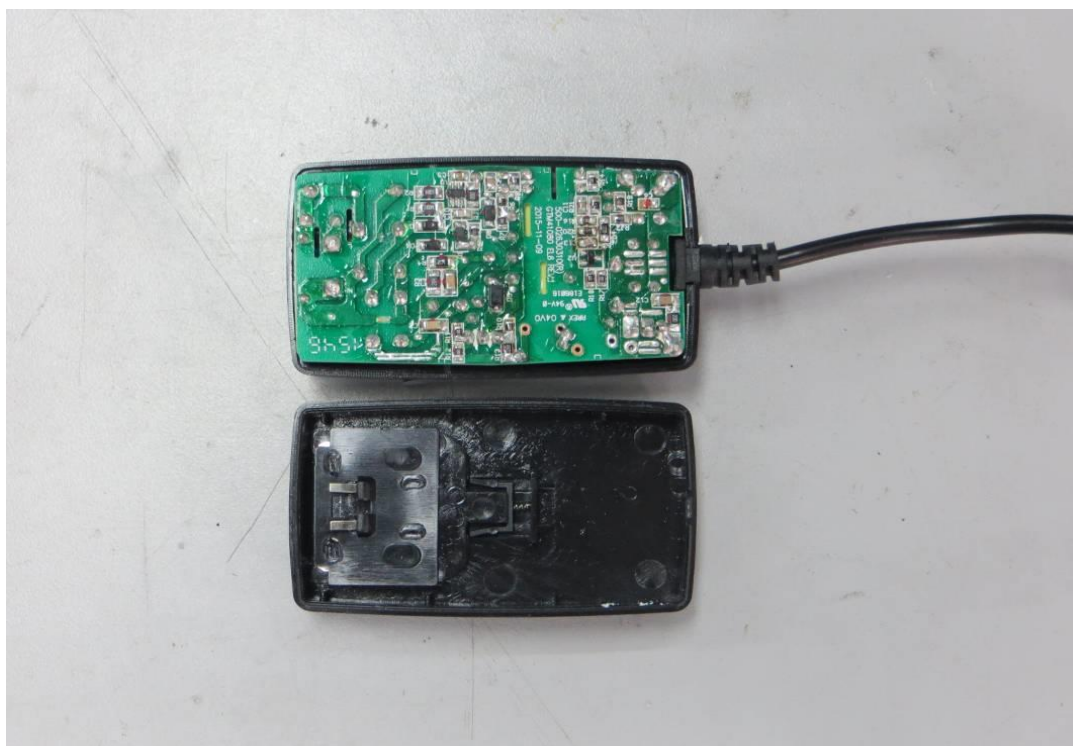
PCB view for GT*96180 series (Interchangeable plug)
